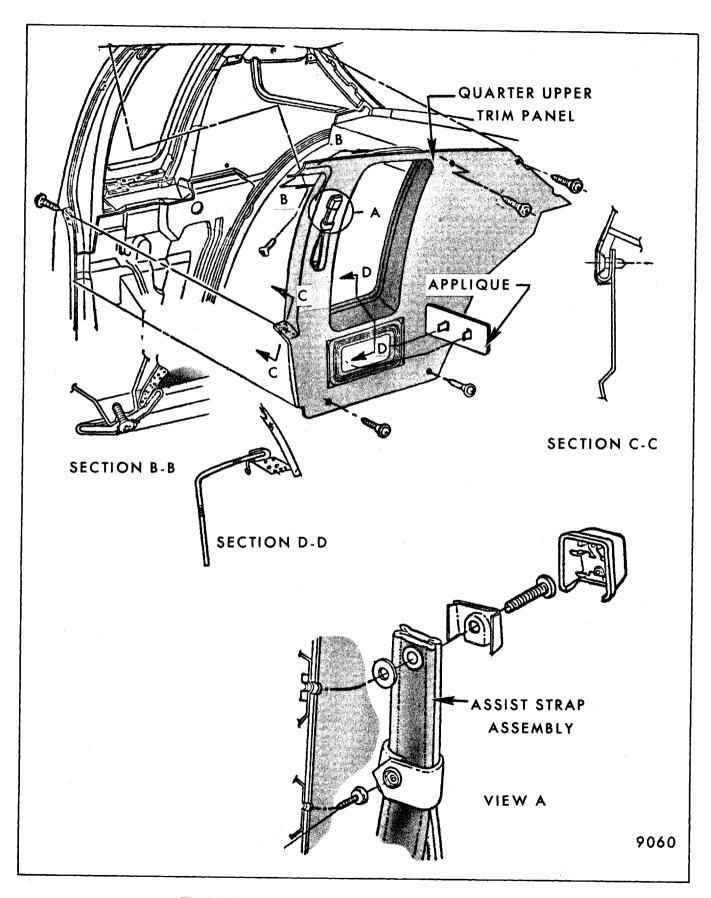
Quarter Upper Trim Attachment - Oldsmobile E-57 Style
